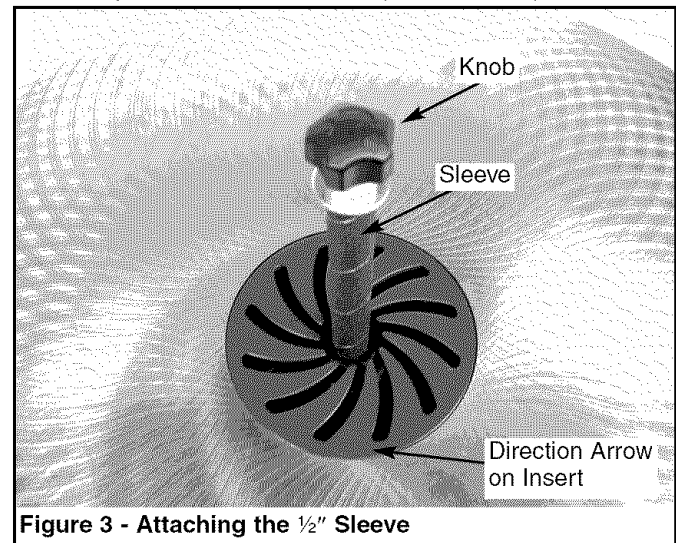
Attaching the $\frac{1}{2}$ " Sleeve
